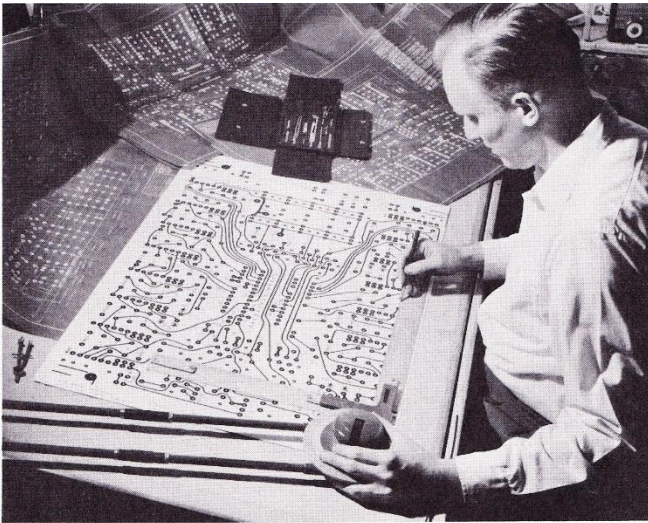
Hand-drawing of a printed circuit in 1960. Early methods used stencils and a light board [5]
